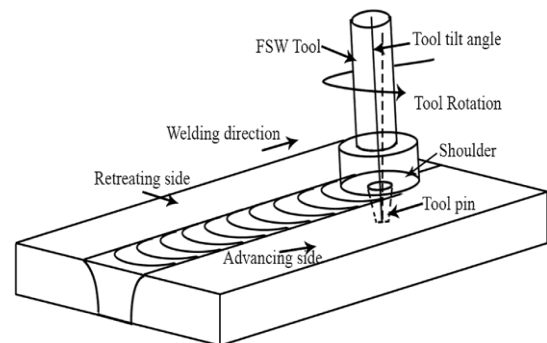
Schematic Diagram of Friction Stir Welding
